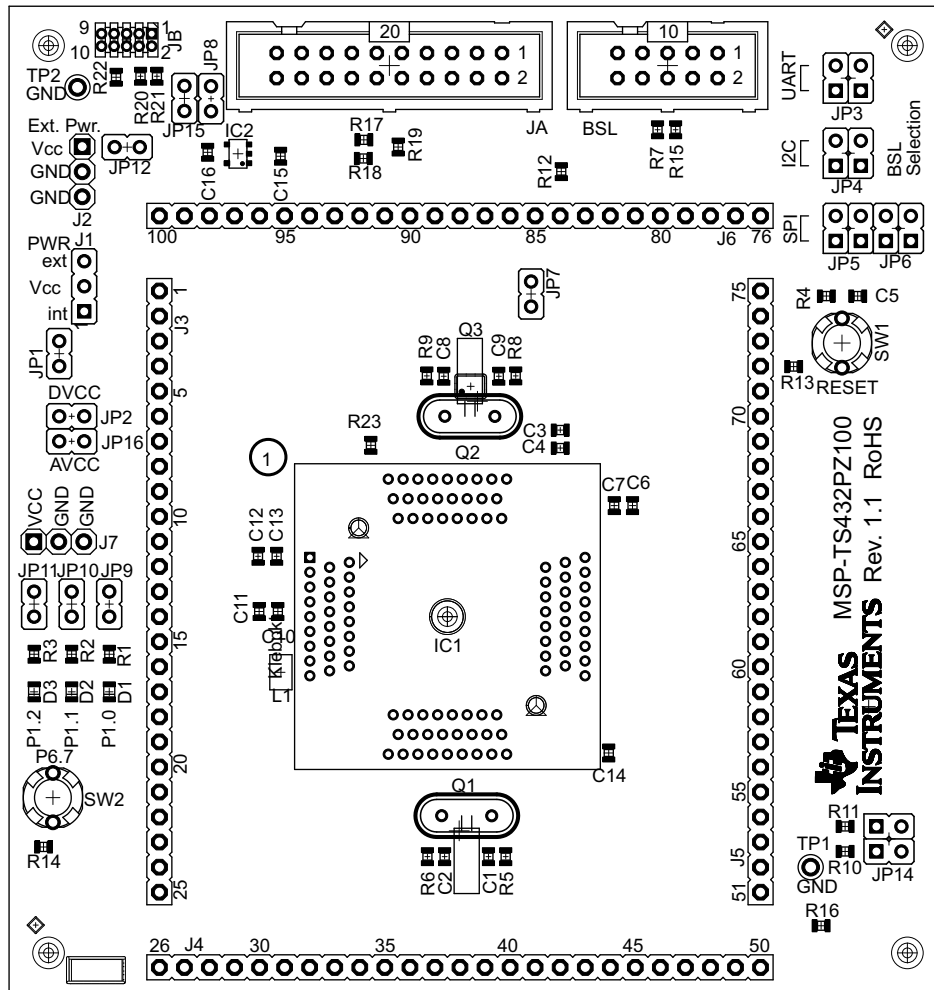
MSP-TS432PZ100 Rev 1.1 Target Socket Board, PCB
